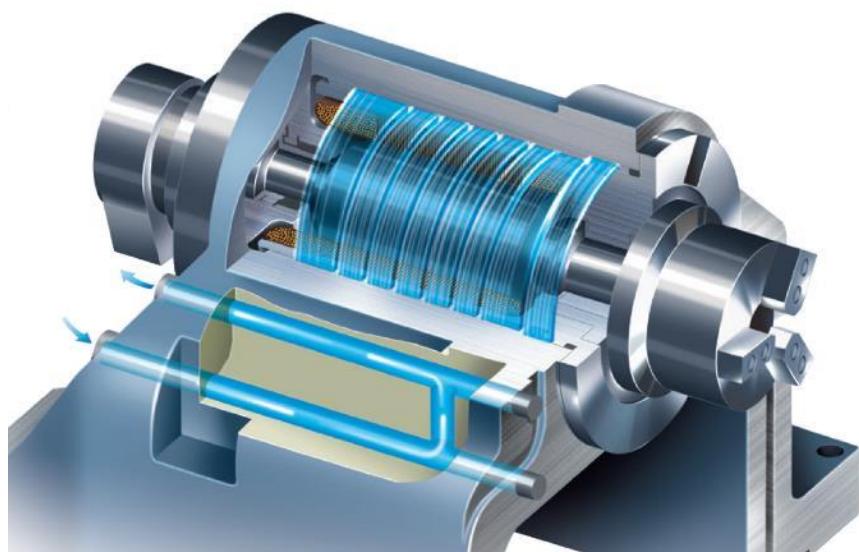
Electric spindle with cooling system shown in section view [73].
